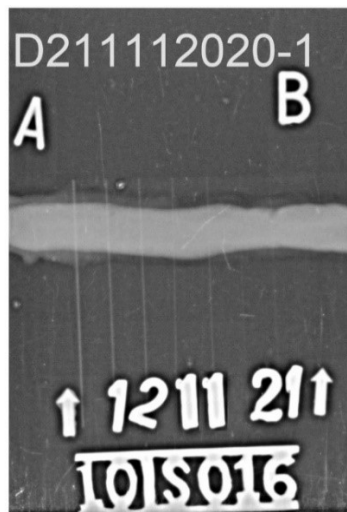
17 Radiography inspection test of U-CMT sample 6
